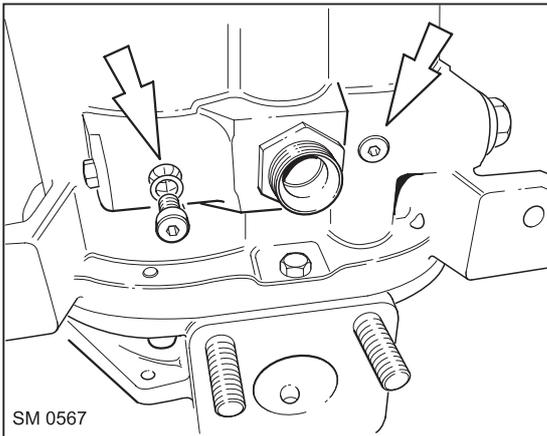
Fitting New G 1/8" Plugs and Seals
